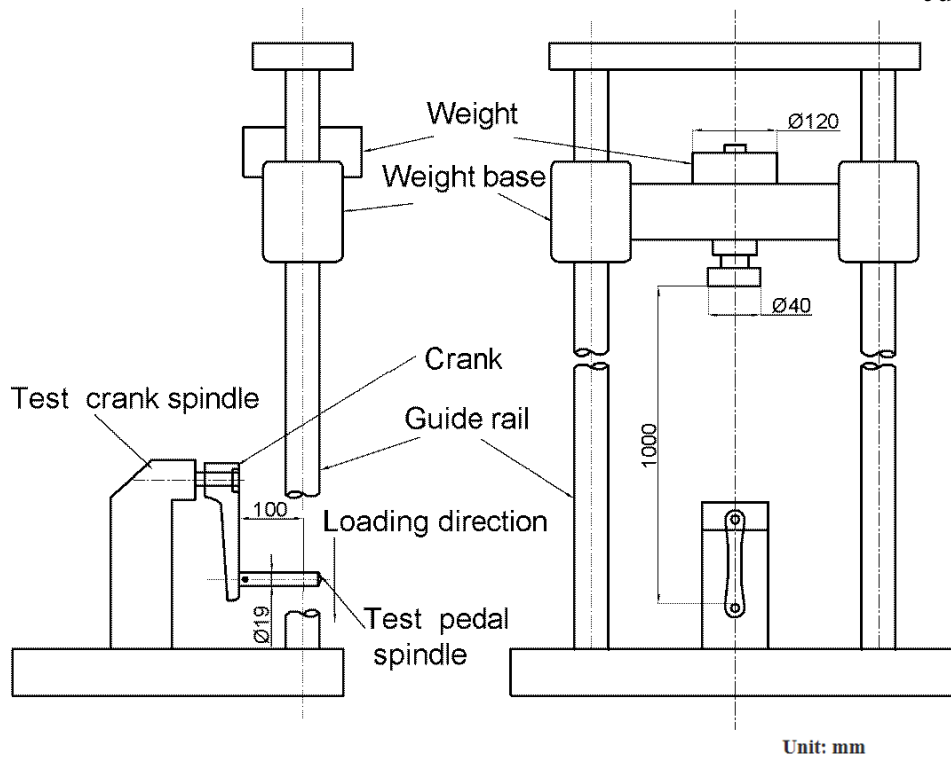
Drop Impact Test for Crank in Vertical Position
